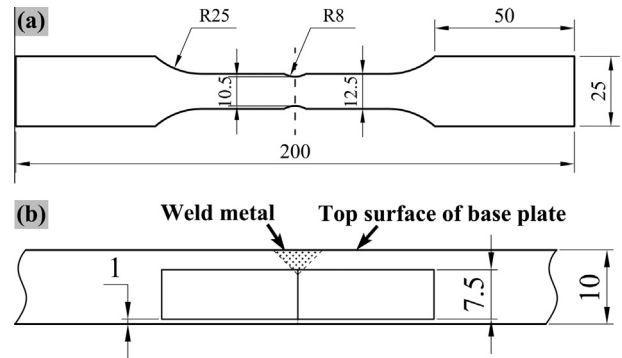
Geometry design of (a) tensile specimens and (b) impact specimens.
